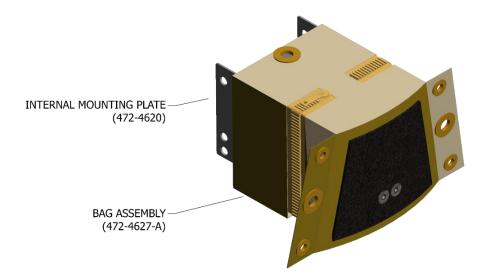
Fabric Bag Assembled to Mounting Plate
